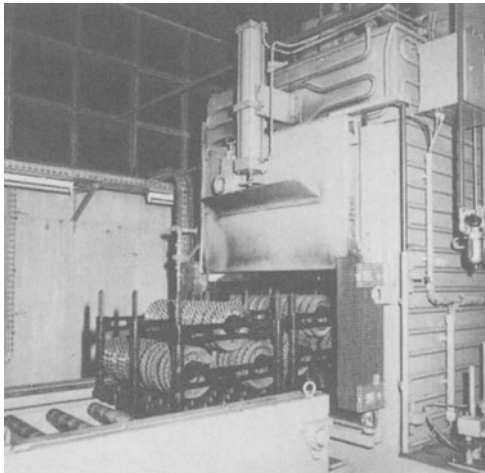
View of a gas carburizing batch furnace and helicoidal gears load .
